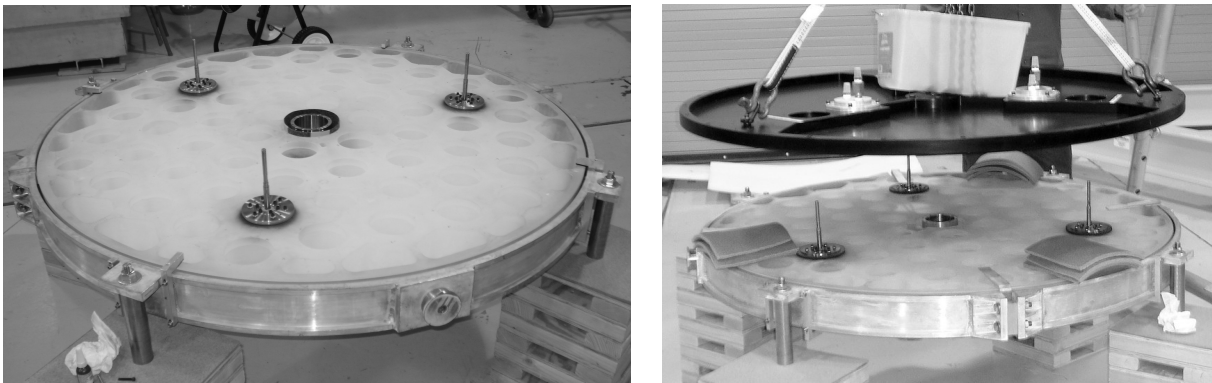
Left: Axial posts and radial hub assembled in the secondary mirror (M2). The holes for lightweighting the mirror are also clearly visible. Right: M2 backing plate assembly.
